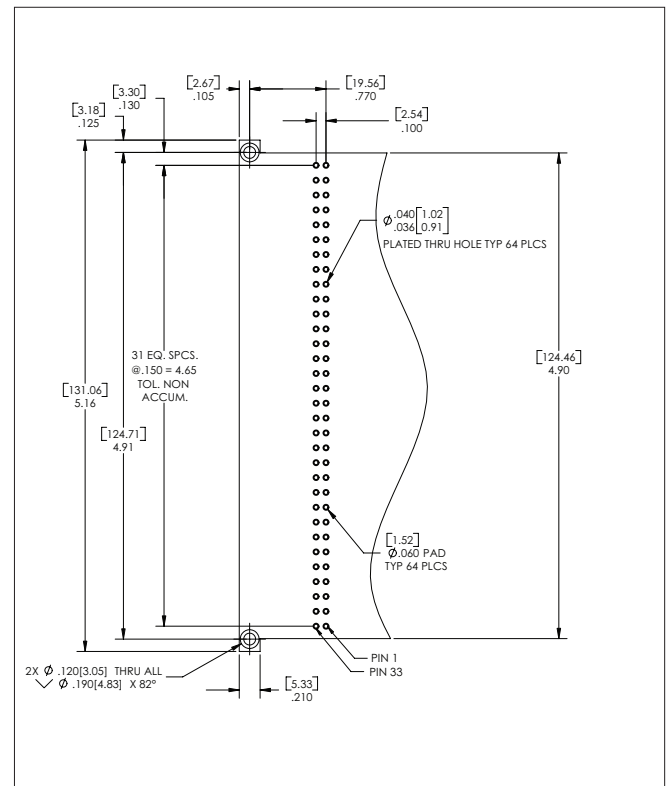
108 112 recommended board layout. Solder side shown.
